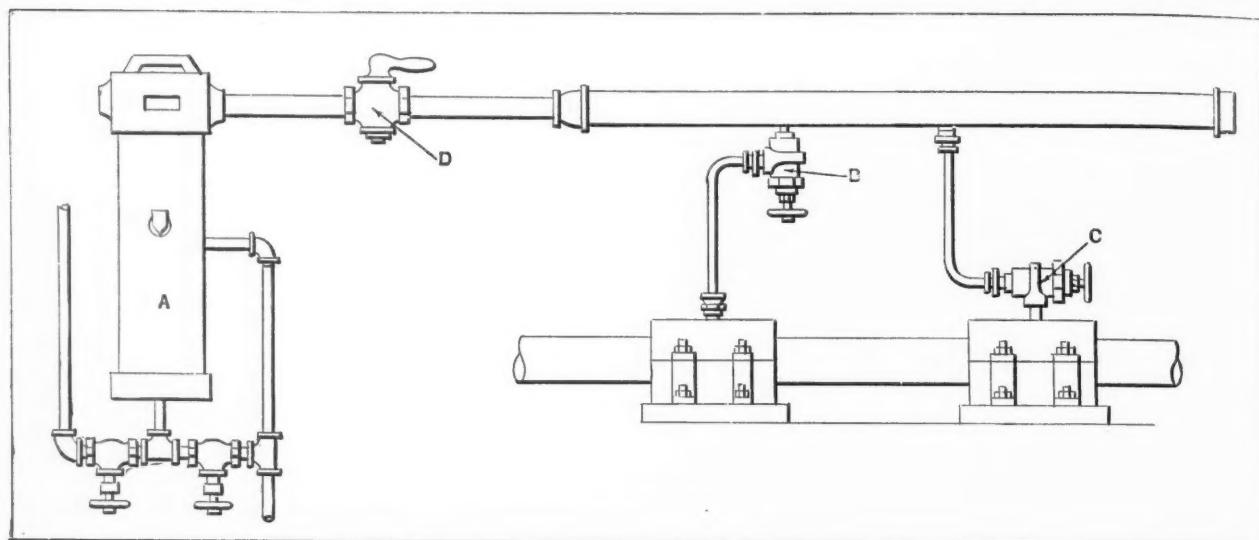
Diagram Indicating Manner of Installing the "Ideal" Lubricating System on Machines, Conveyors, etc.
